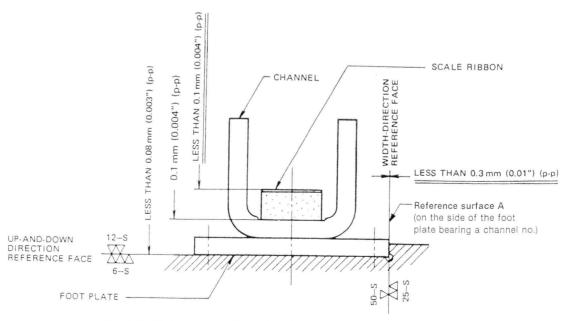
Tolerance of dimensions in mounting the channel and the scale
